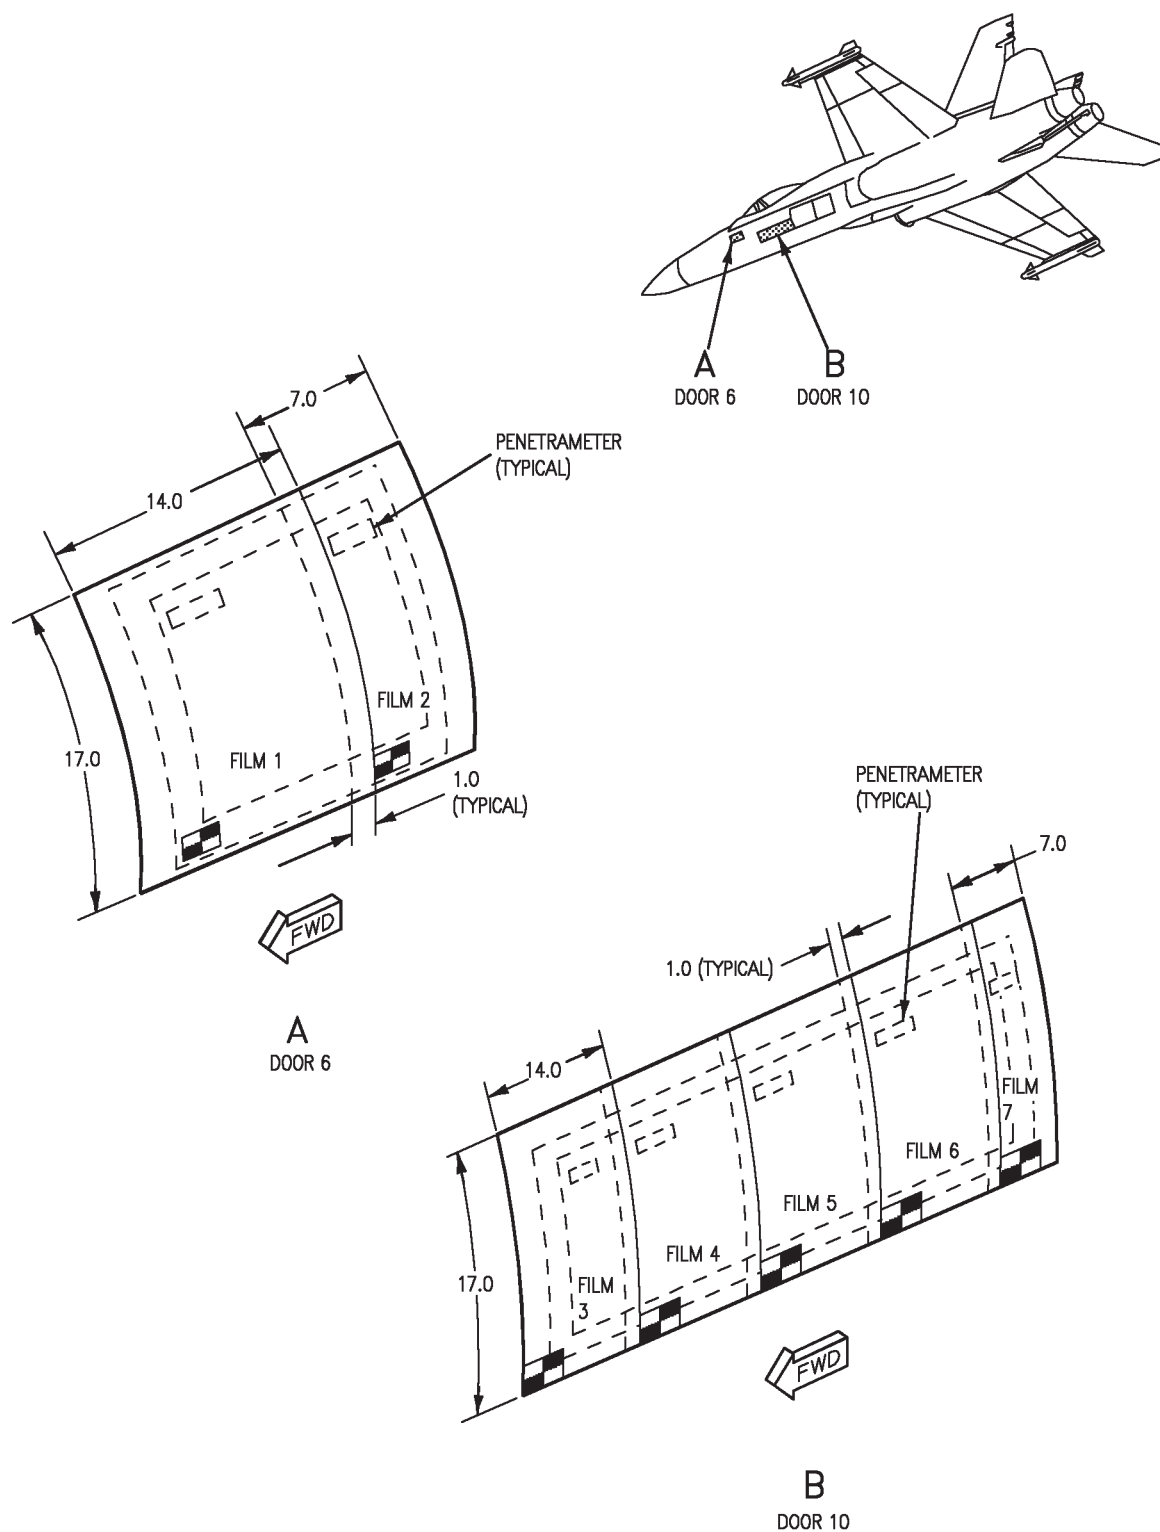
Bonded Honeycomb Doors, Water in Honeycomb (Sheet 1)
